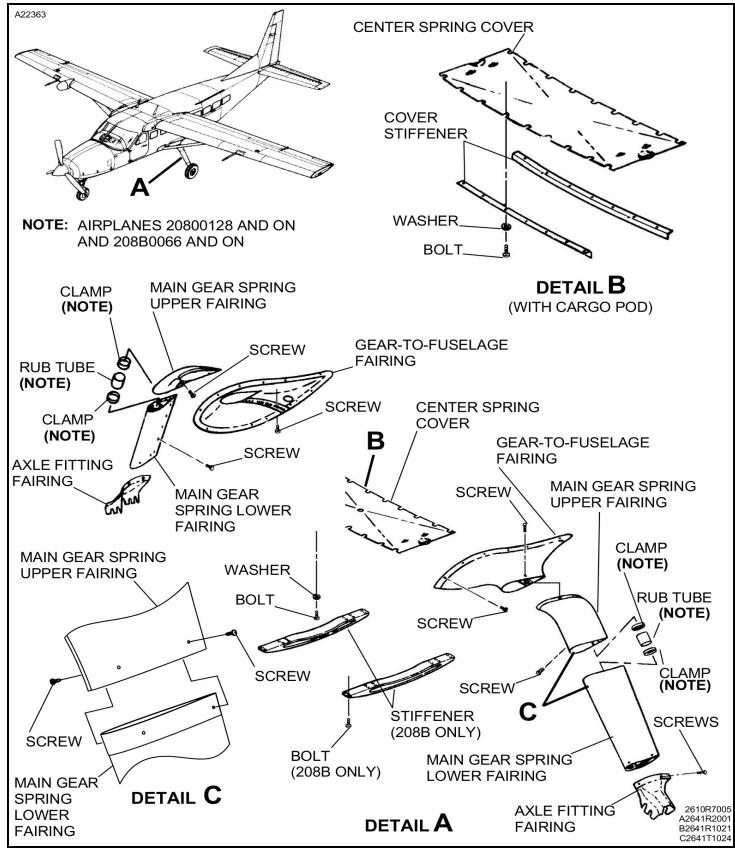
Sheet 1 : Main Landing Gear Fairing Installation
